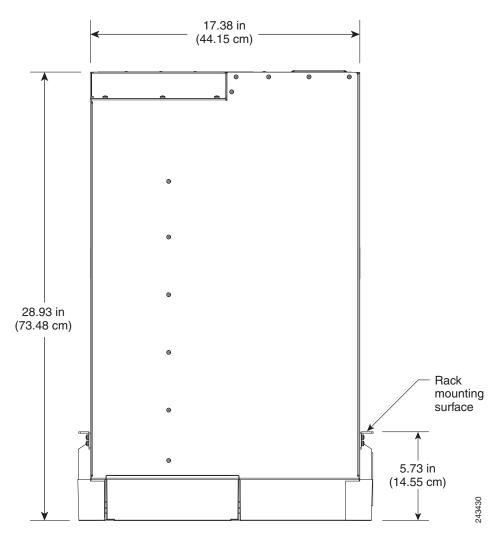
Cisco ASR 9010 Router Chassis Footprint and Dimensions—Top-Down View
